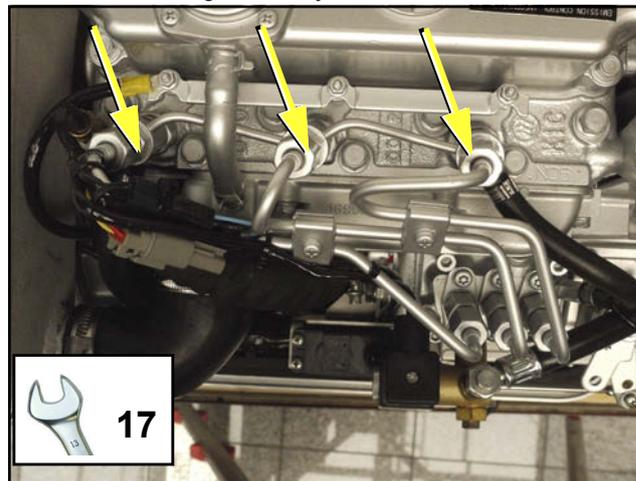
Ventilation screw at the fuel solenoid valve
